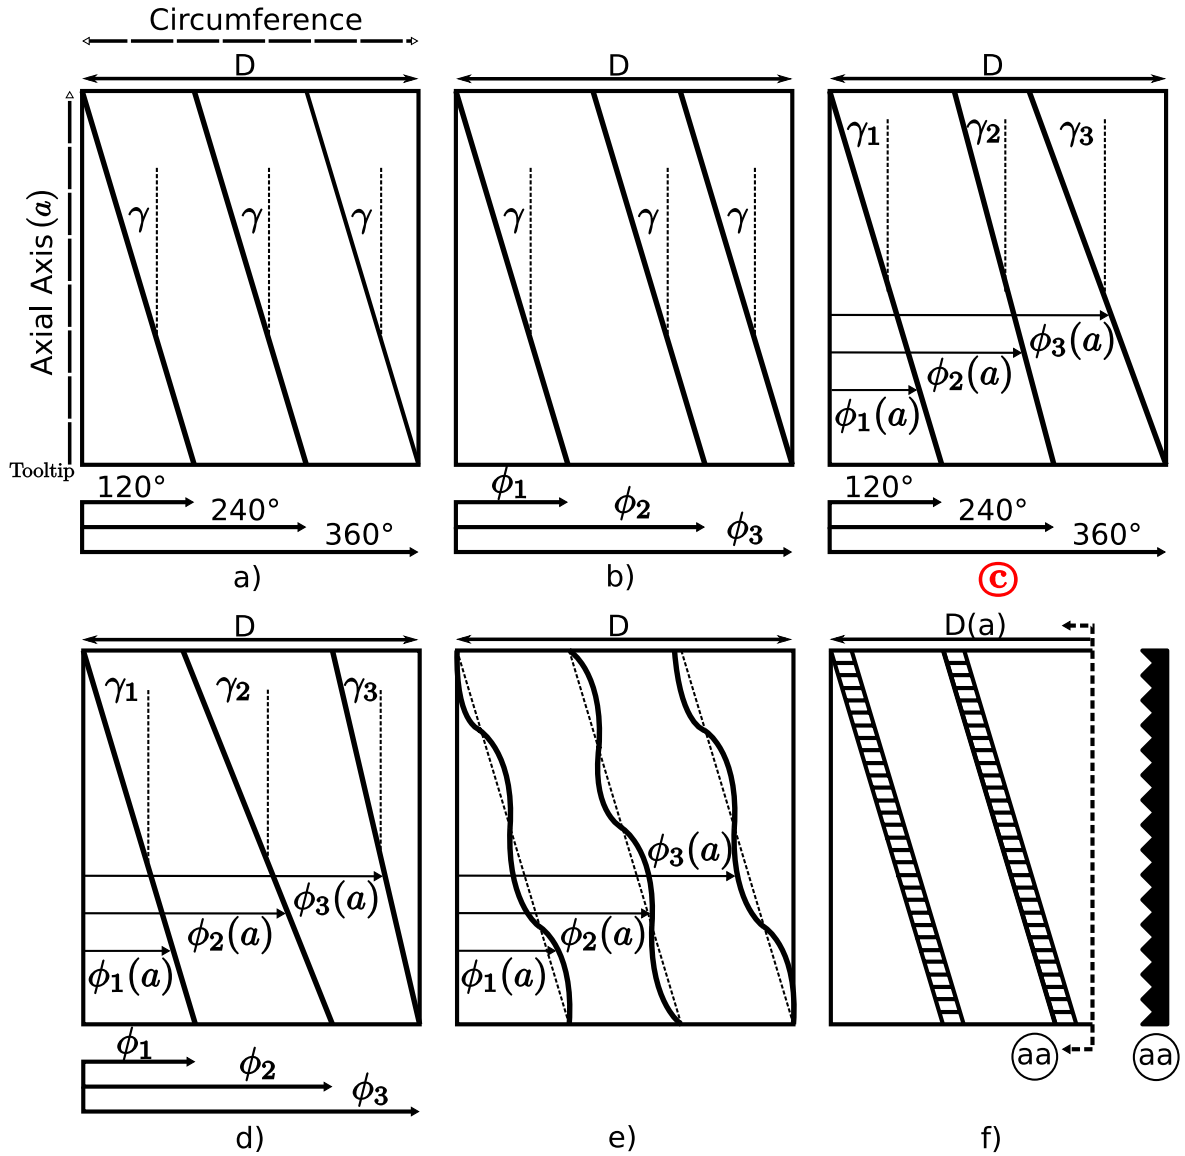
Circumferential view of milling tool geometry. a) Conventional milling tool, b) Variable-pitch milling tool, c) Variable-helix milling tool (Tool implemented in the current project), d) Variable pitch and helix milling tool, e) Harmonically varied milling tool, f) Serrated milling tool (Cross section \textcircled{aa} shows the tool's serration).
